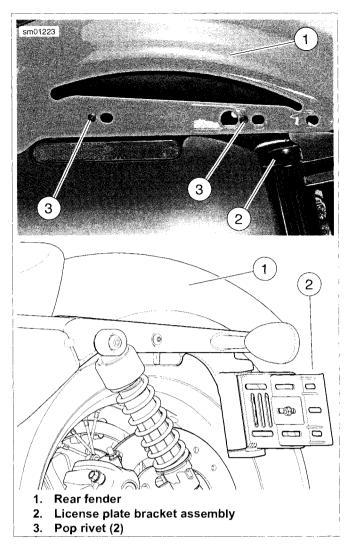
Removing/Installing License Plate Bracket Assembly (domestic)
